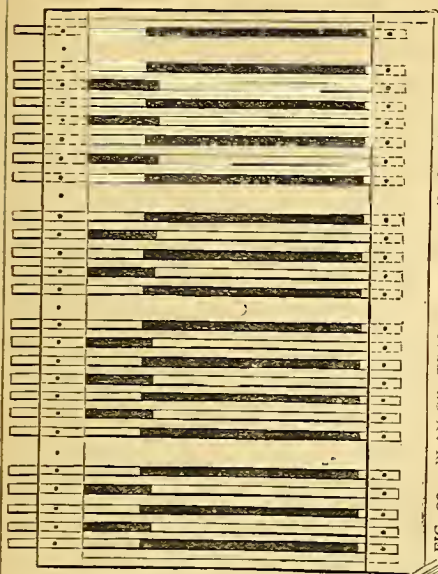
PLAN OF STRAIGHT PEDALS. Scale, 1 inch to a foot.
